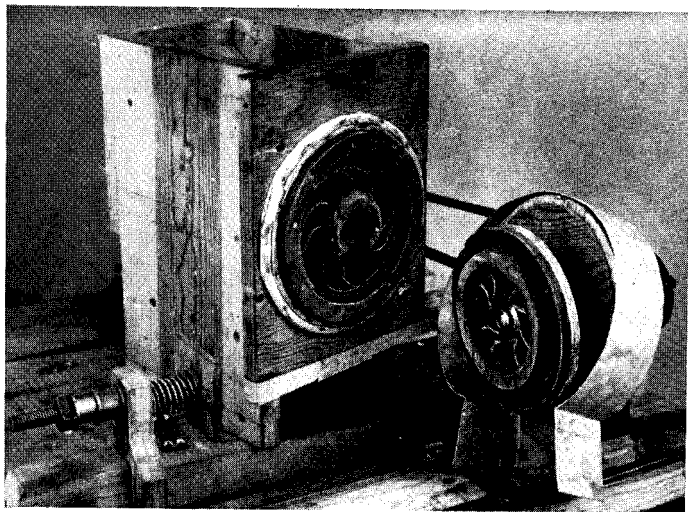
Sheller disassembled, showing addition of rings on disk faces
